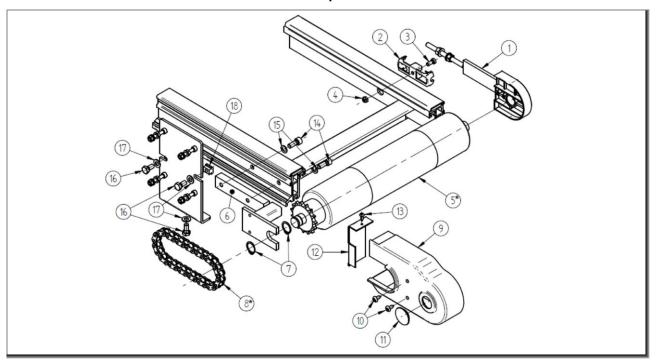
Parts list: External drive unit - drive unit - position of drive unit 23 - ZZ.900.0032.00
